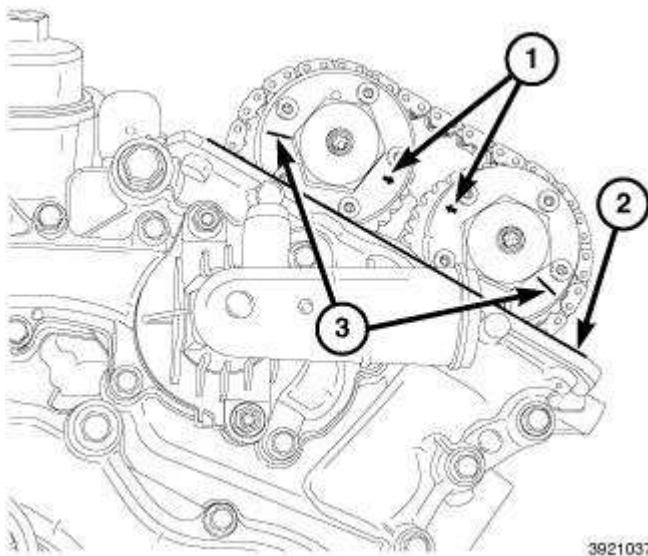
Arrows, Scribe Lines & Cylinder Head Cover Mounting Surface
